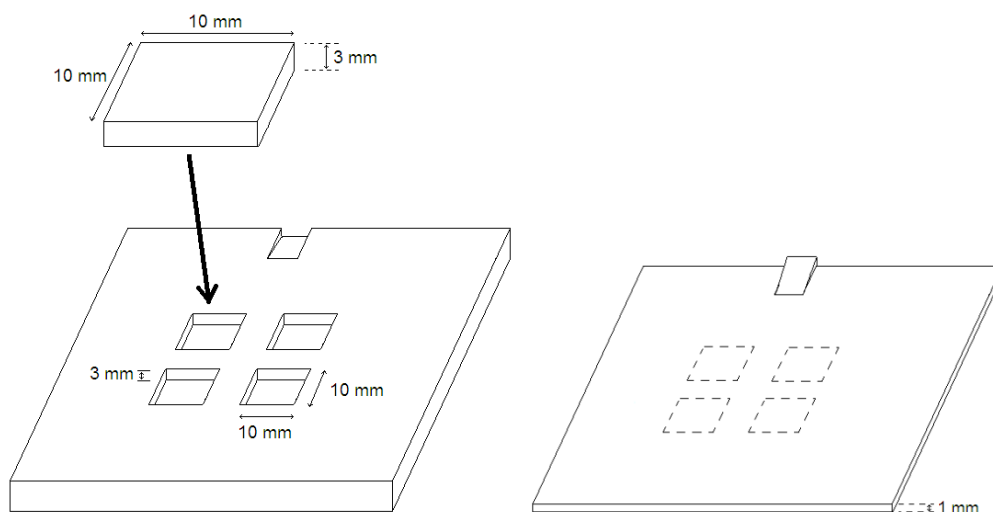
Schematic drawings of the adapted mold tool (left) and the molded polymeric part (right)
